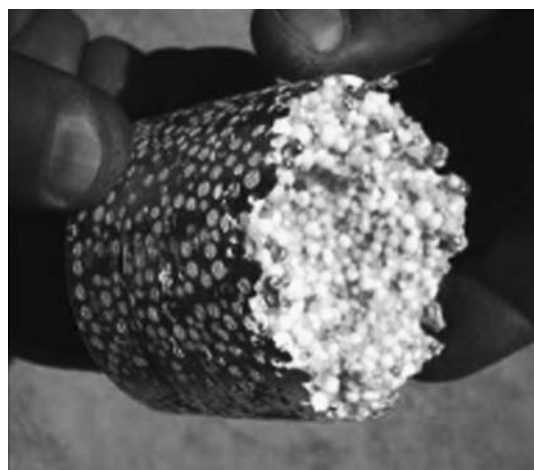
Infiltrated SiO₂ beads after cooling and external lathe machining
